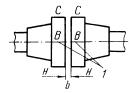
Making notches on half-coupling rims to mark check points for feeler gauges
